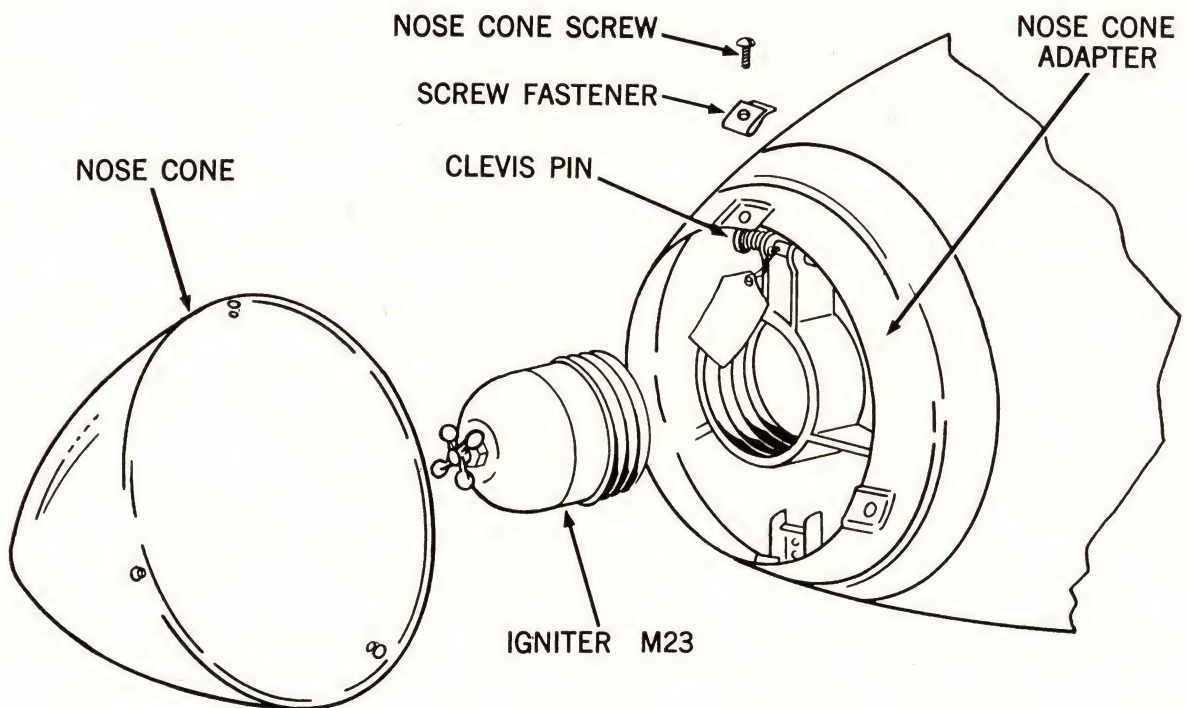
Nose Cone Assembly With Igniter M23, Exploded View.
